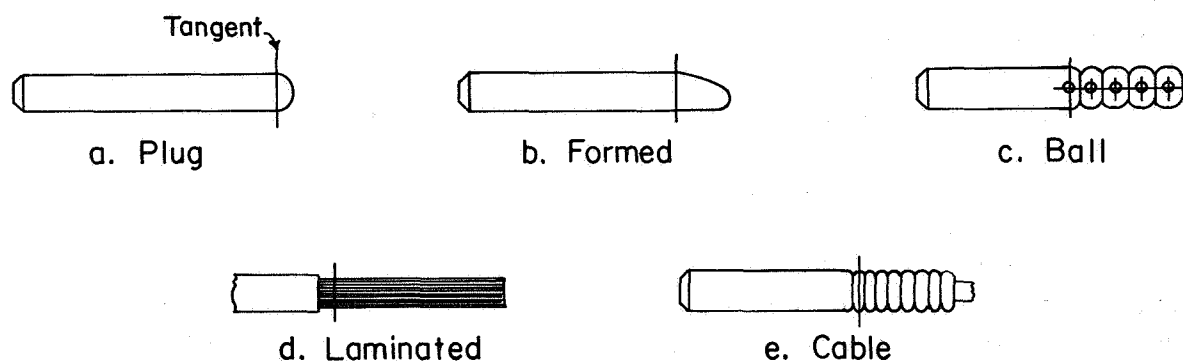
FIVE BASIC TYPES OF MANDRELS USED FOR TUBE BENDING (REF. 90)
